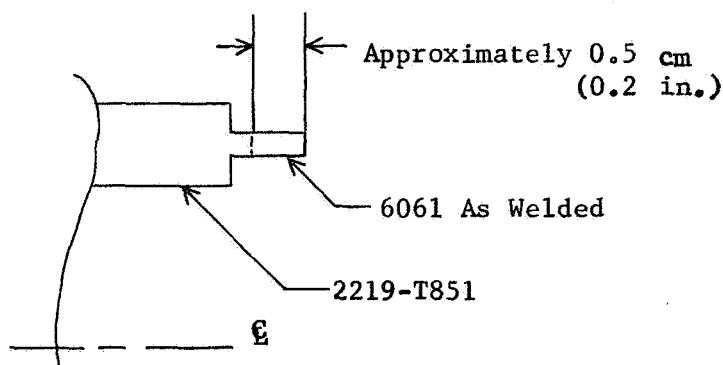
Refacing of 6061 After Inertia Welding
